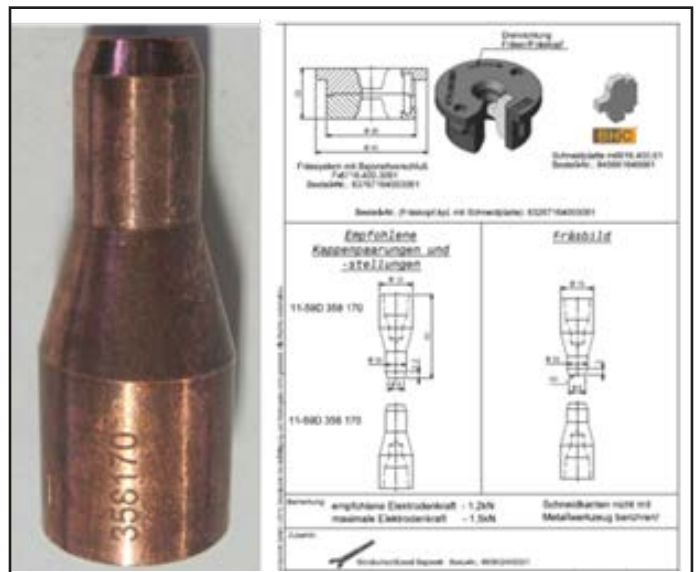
Welding cap (electrode) for projection welding and milling head documentation
